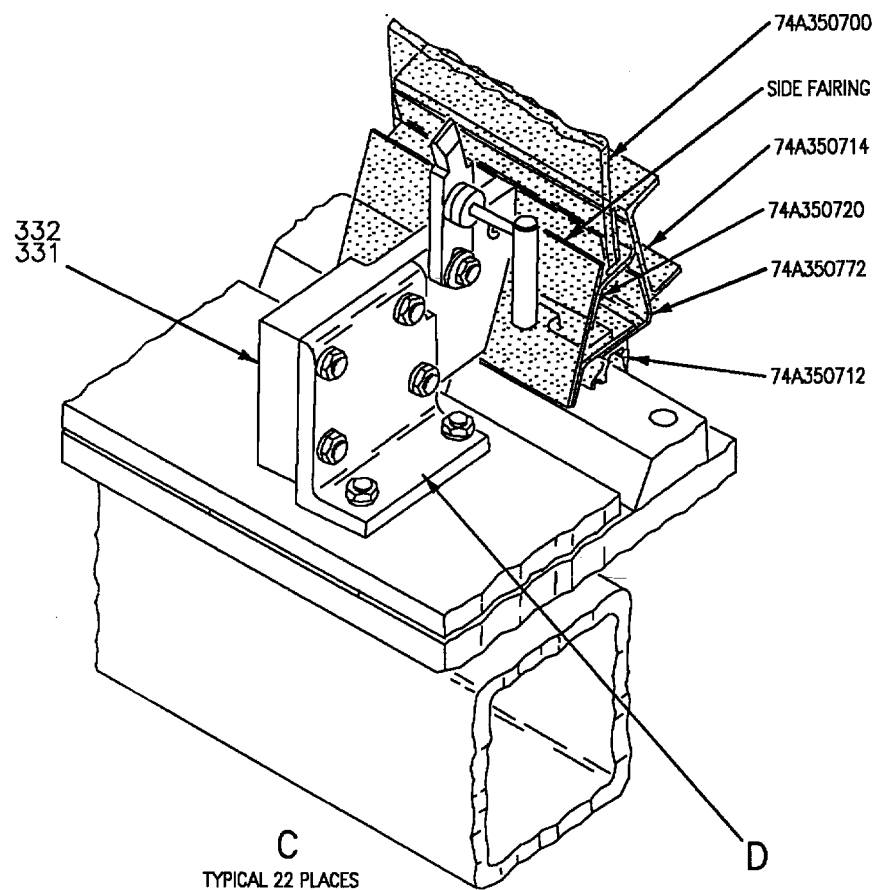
Inspection or Replacement - Side Fairing (Sheet 3)
